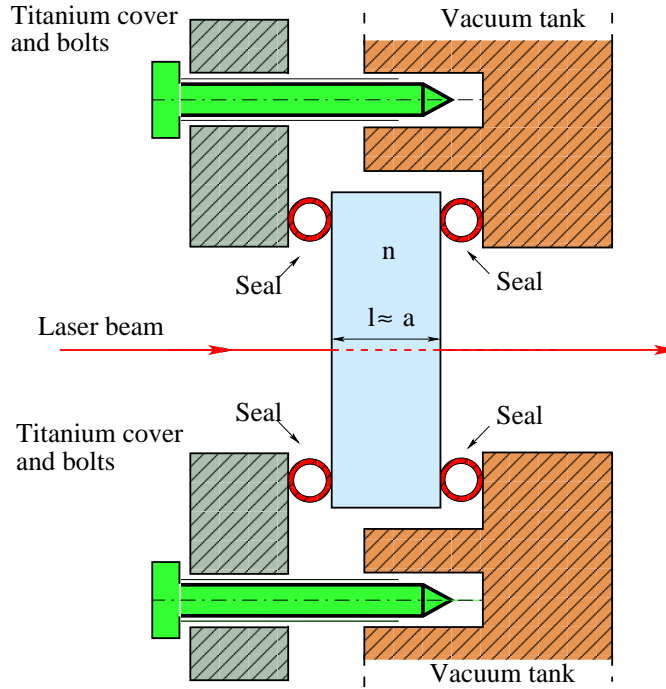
Sectional view of the mechanical assembly of the optical window on a vacuum tank (see Figure 7.9 for a 3D explosion view). Stress induced by the bolts to ensure leak-proof vacuum is ultimately applied to the optical window by the sealing rings.
